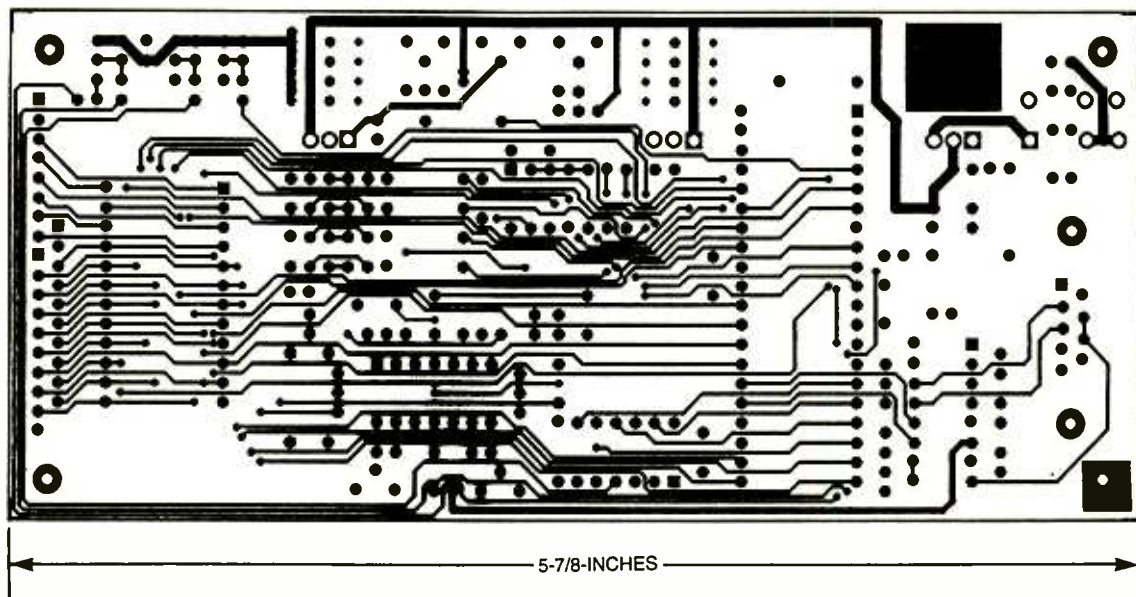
The board design for the Alta Pro 2000 is double-sided. Getting this solder-side pattern to align with the component-side pattern will test the mettle of any seasoned hobbyist.
